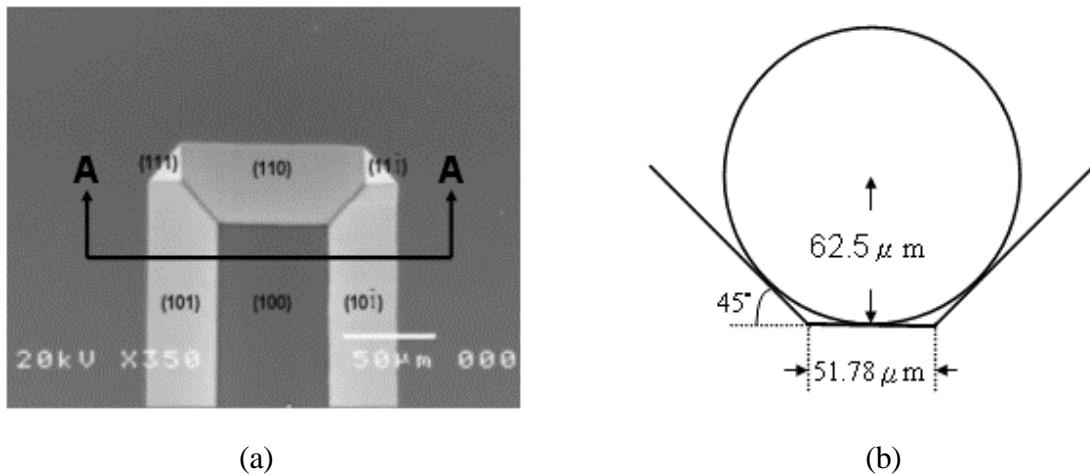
(a) top view and (b) A-A cross section of V-groove
